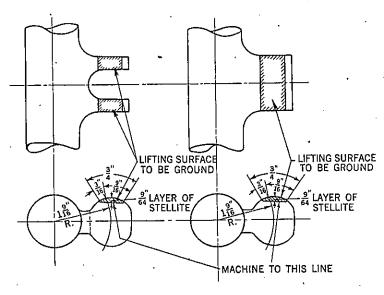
Method of Applying Stellite to Throttle Valves and Cams
